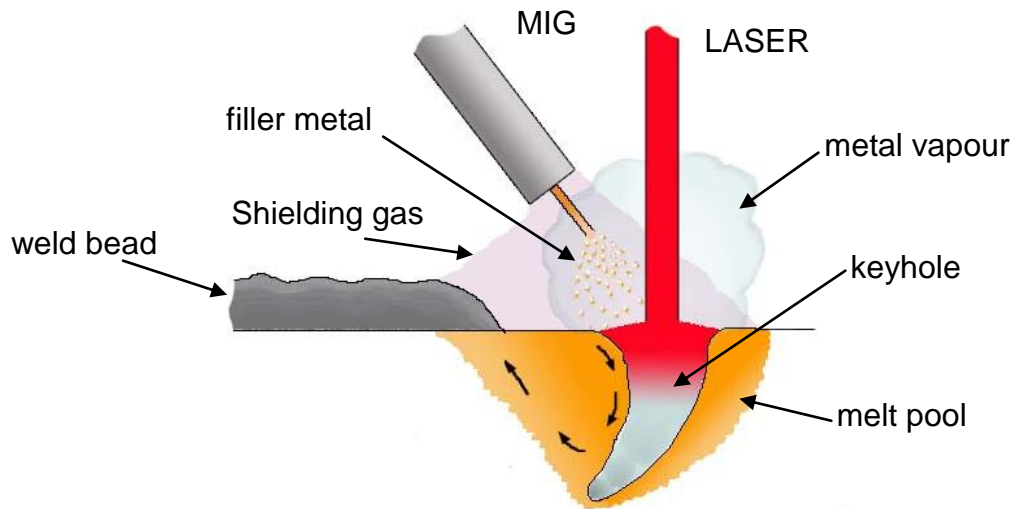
Interactions in laser MIG hybrid welding.
